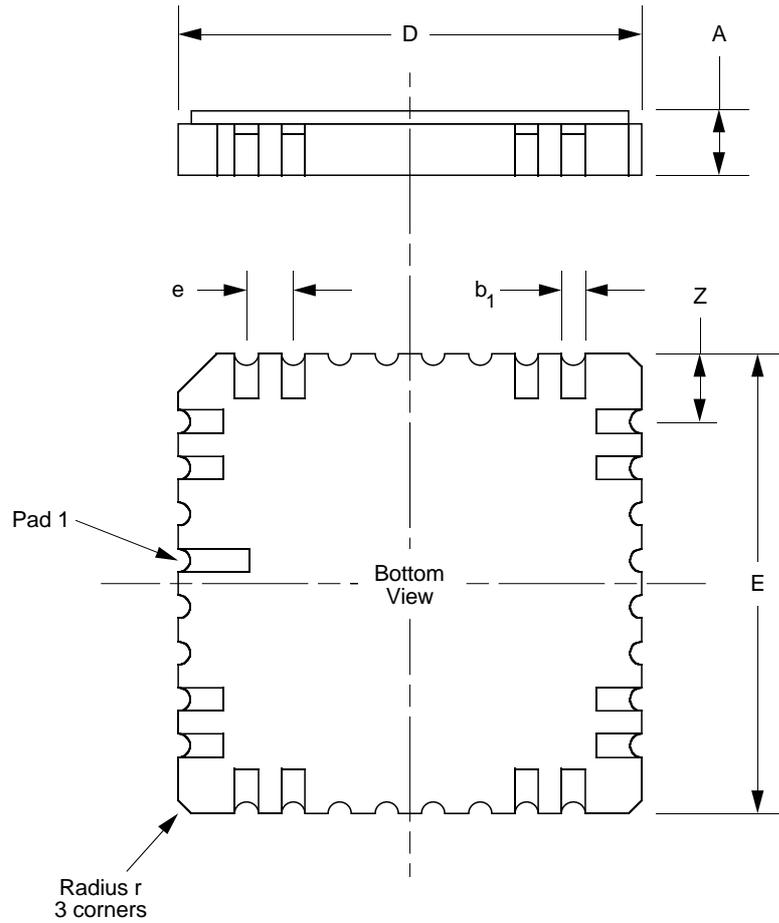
64-Lead Leadless Chip Carrier - Package Style L
